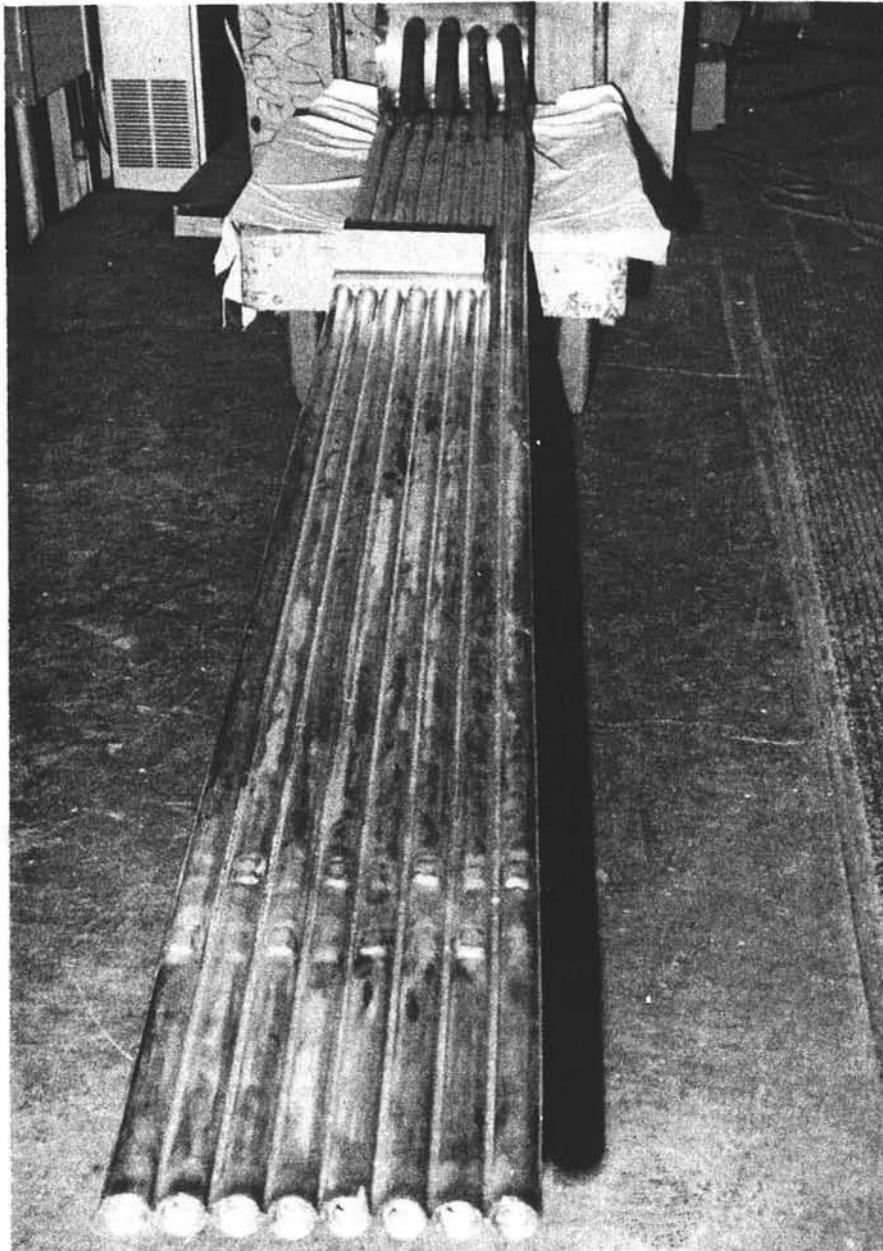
MEMBRANE WALL CONSTRUCTION
